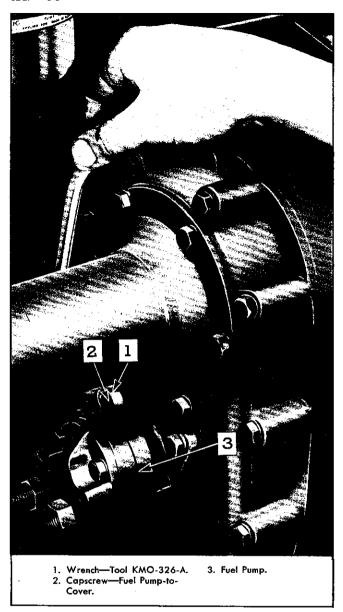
Typical Fuel Pump Mounting and Removal of Capscrews with Tool KMO-326-A.
